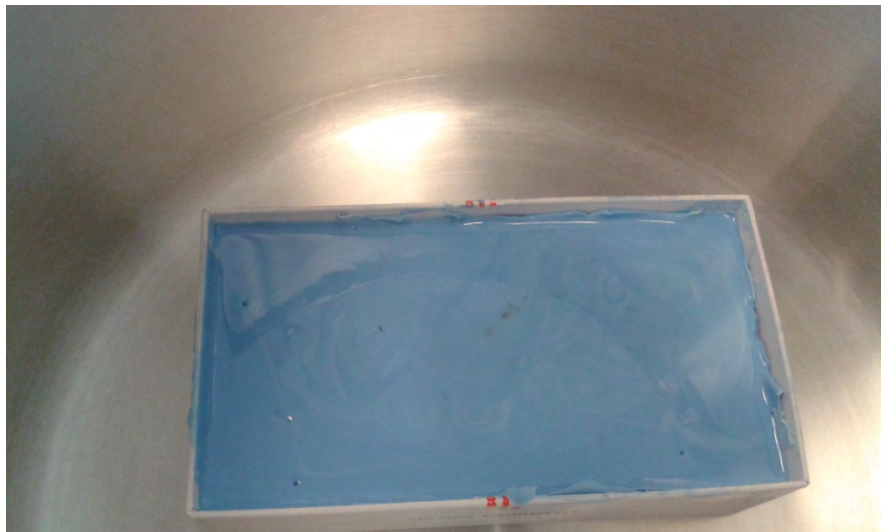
Preparation of silicone resin molds - a complete two-part mold.
